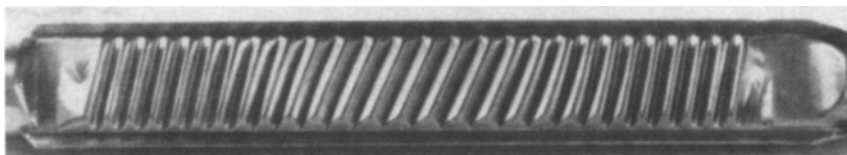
Variable pitch gear rack, 25 mm × 570 mm, for rack and pinion steering of a front wheel drive car made on an orbital forging machine, finish machined and induction hardened.
